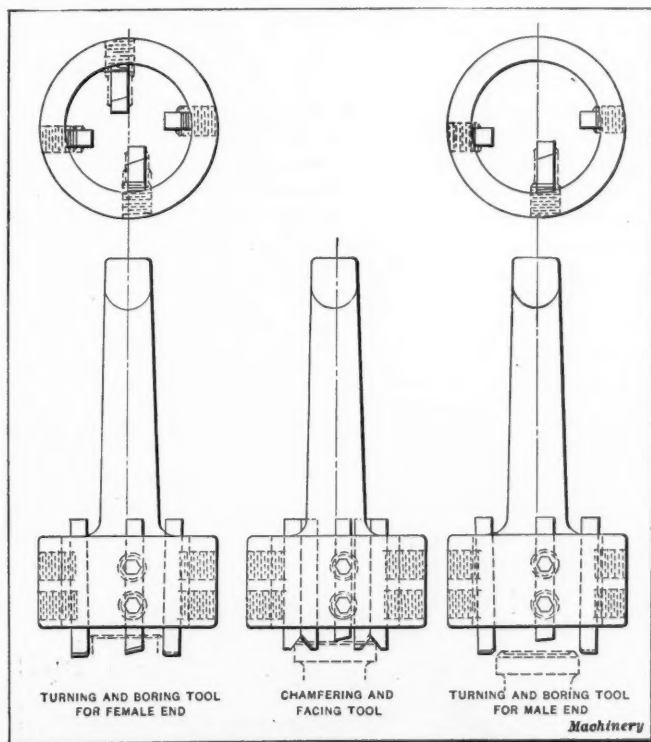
Tools used for turning, boring, chamfering and facing U-fittings
